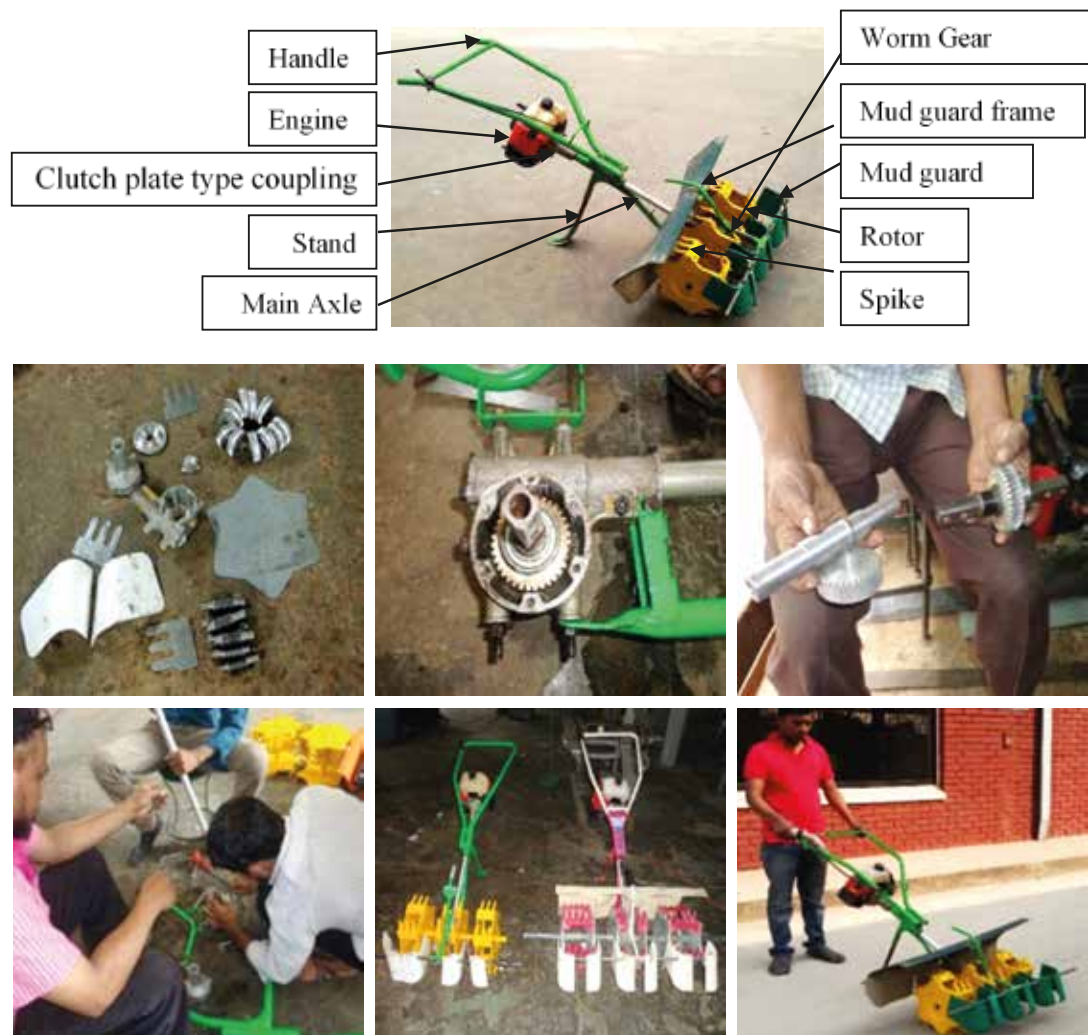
Complete view of the fabricated power weeder with different parts of the weeder.
